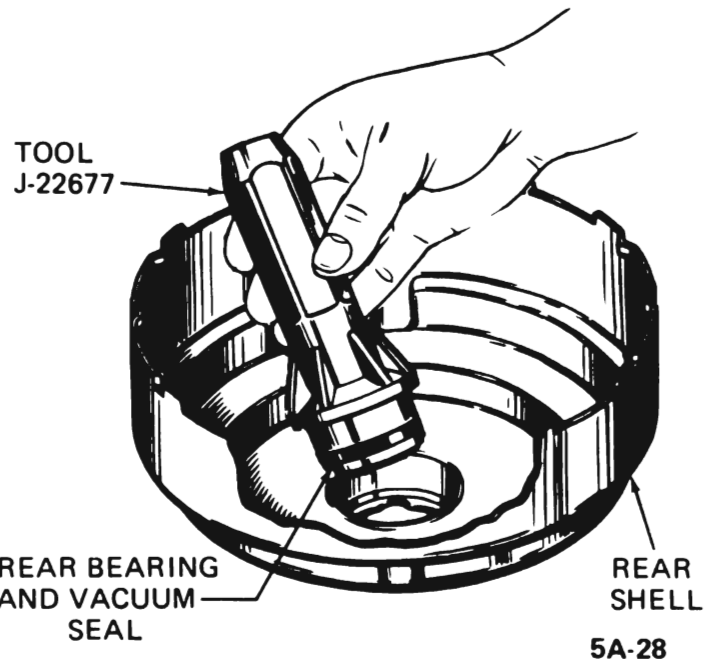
A-28 Installing Rear Bearing and Vacuum Seal
